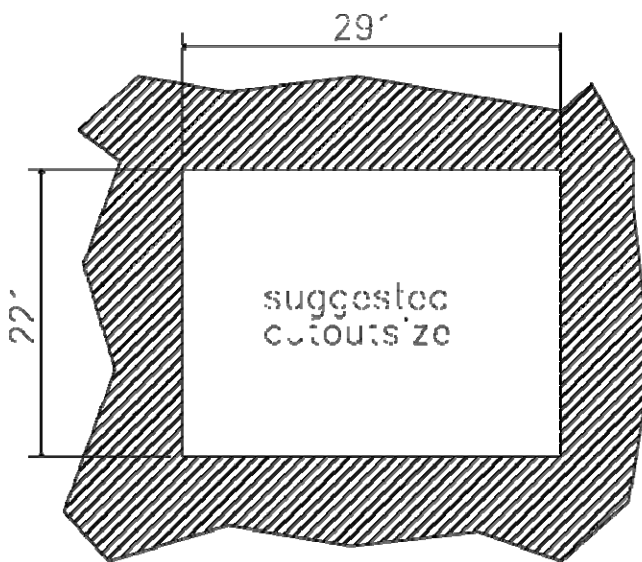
PPC-3710A-N26 Panel Cutout Dimensions
